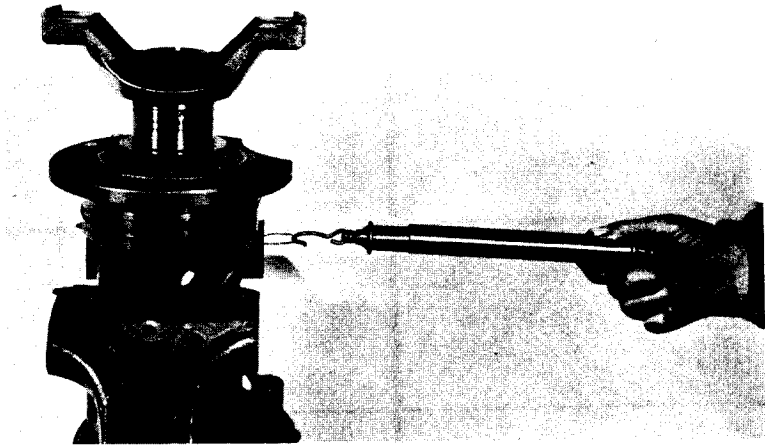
Checking Drive Pinion Bearing Preload with a Spring Scale (pinion in vise) for Tandem Drive Axles
